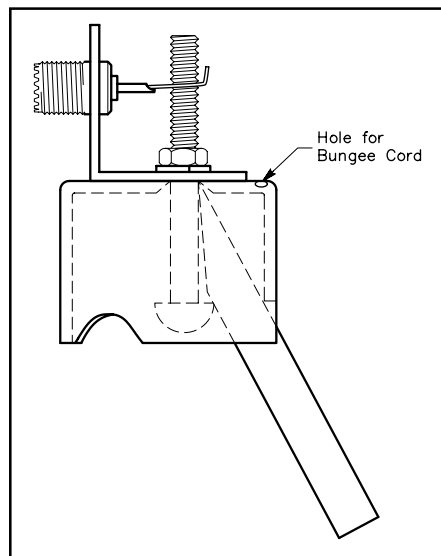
The tripod top cap. The three $\frac{5}{8}$ -inch-diameter aluminum tubes are 4 inches long, cut at a 30° angle at the end within the cap. From inside the cap, countersink a $\frac{3}{8}$ -inch hole in the cap top. This forms a trap that holds the ends of the aluminum tubes. Although only one of these leg supports is shown, all three are held between the bolt head, the three slots (either carved or filed in the wall of the cap) and the countersunk hole in the cap top. The slots in the cap are about $\frac{3}{8}$ -inch deep and wide enough to receive the aluminum tubes. An easy way to lay out the slots is to use the fluted handle from an outdoor water faucet as a template. The handle fits nicely against the cap and has six flutes about the circumference allowing you to mark three equally spaced locations.
